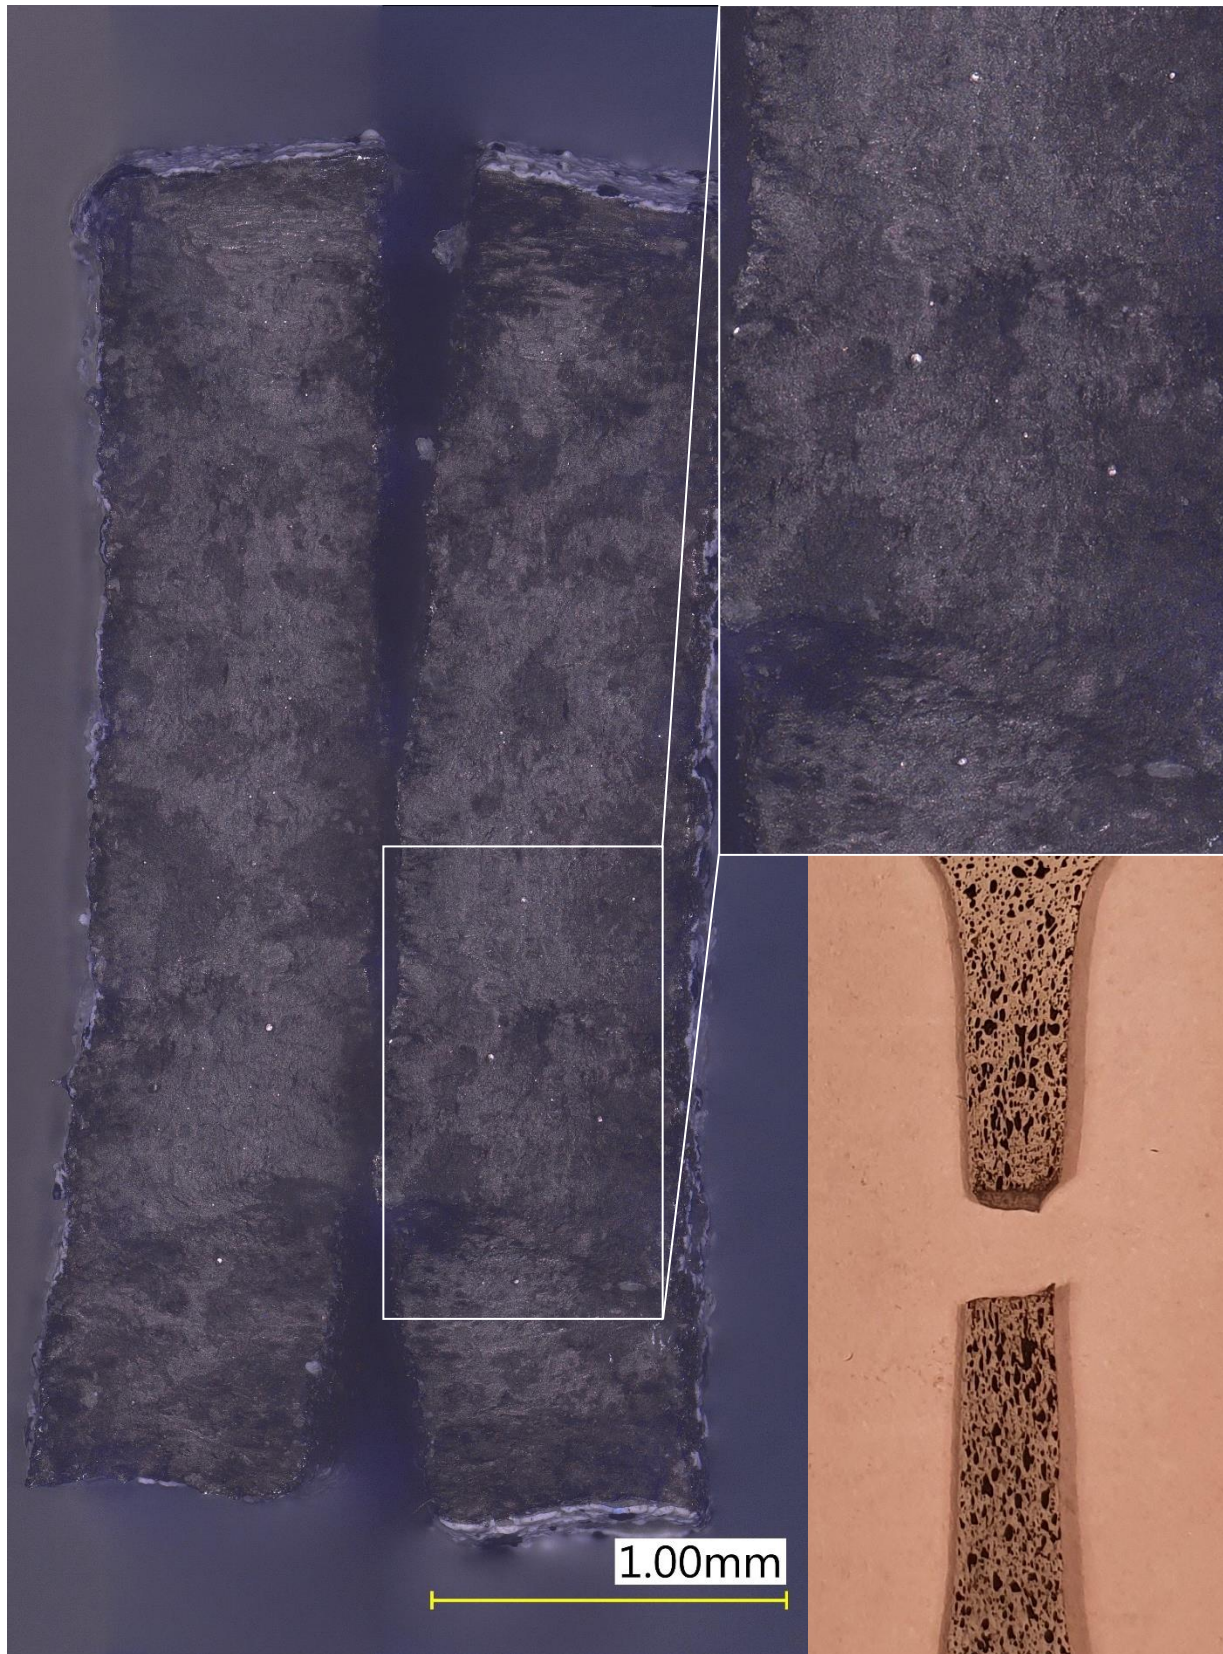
Fracture surface of a 316L SLM Y-direction sample
